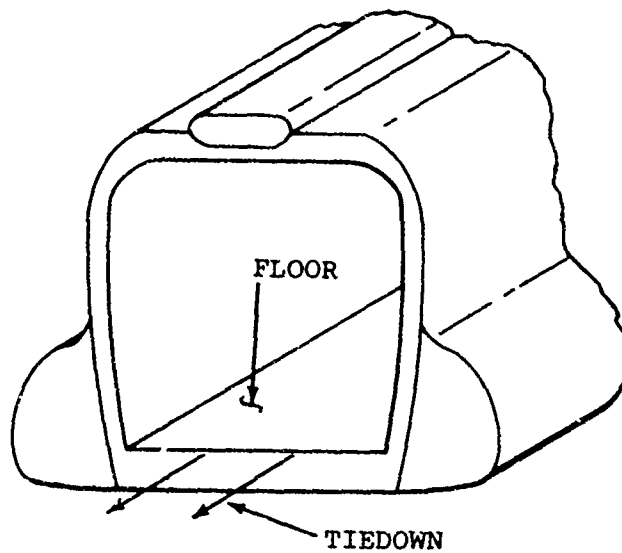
Upper Cap of CH-47 Floor Frame Acting as Bending Member.
